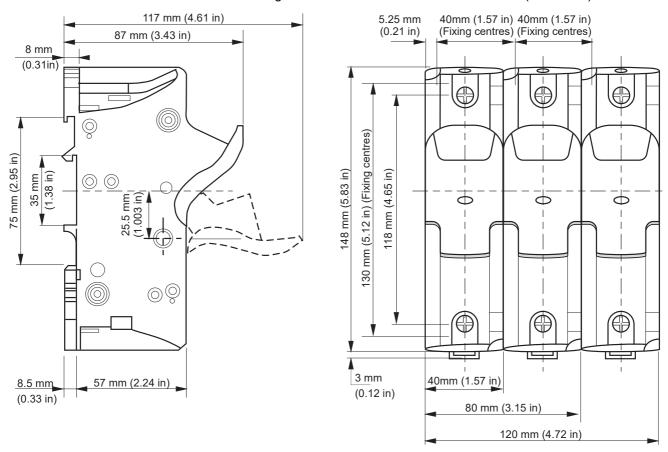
Fuse holder dimensions: US271 (27x60mm)
